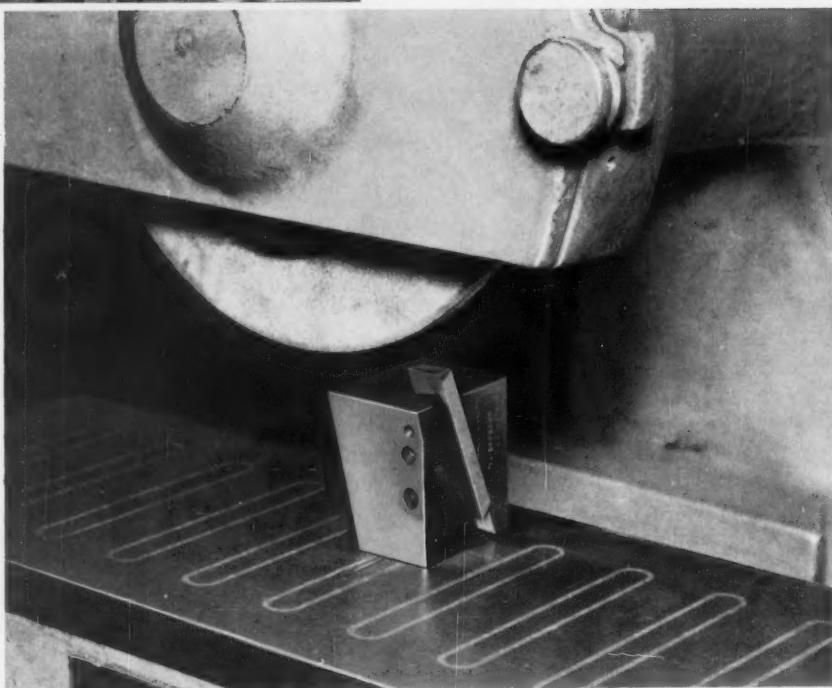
(Right) Solid carbide blades may be ground on a conventional surface grinding machine. Peripheral relief is being ground on one such blade while it is held in a special fixture on a magnetic chuck.
